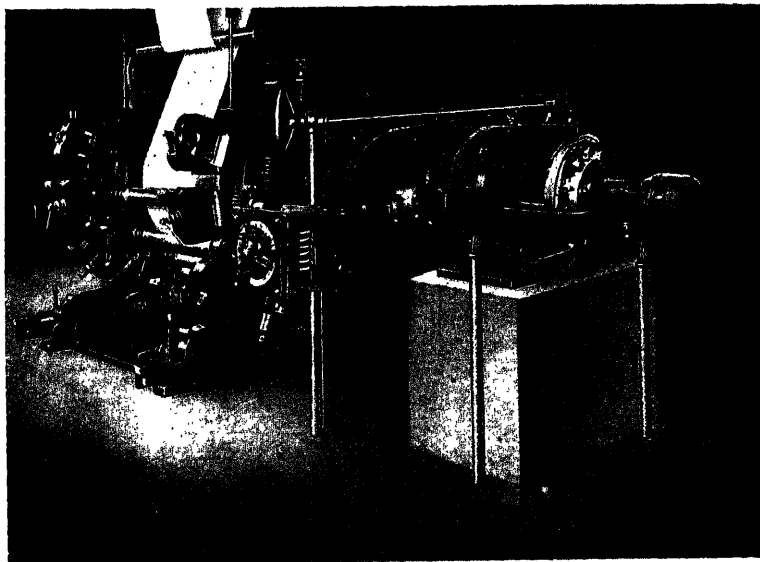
Eight colour machine with direct connected Asea three-phase commutator motor and self-contained reduction gear.
